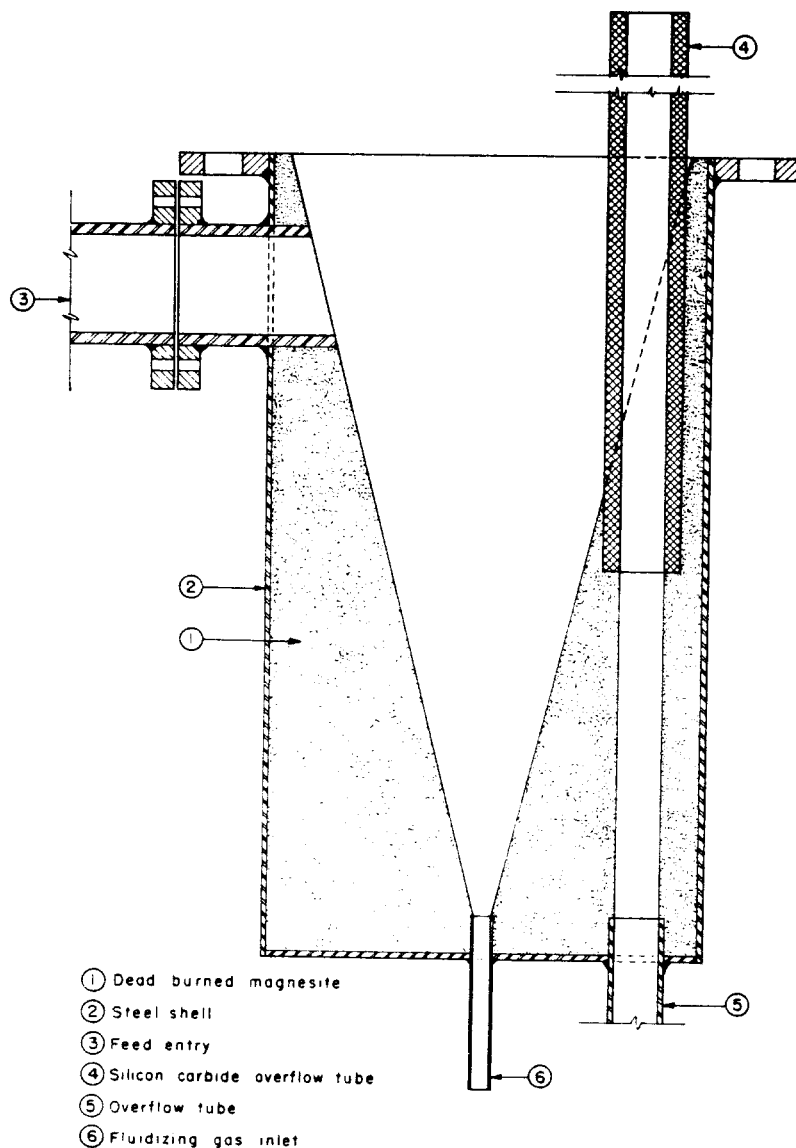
Cross-Sectional Drawing of Fluidizing Cone.
